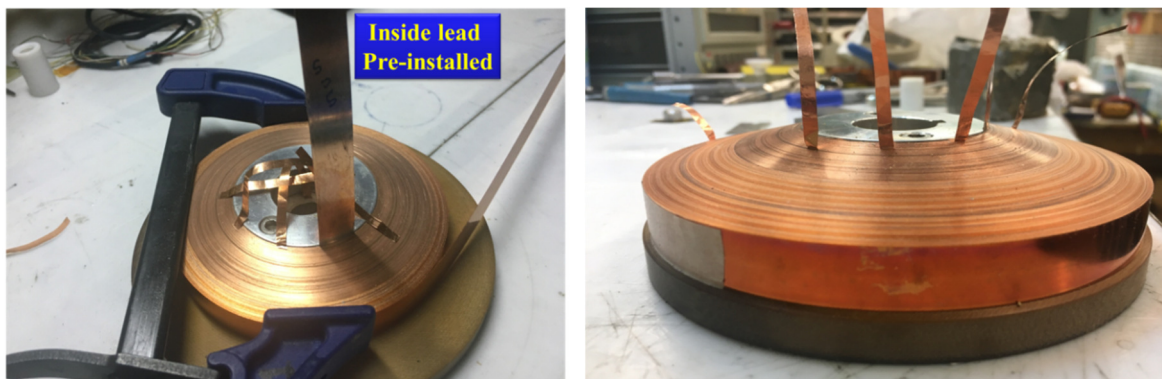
&b. HTS coil on its conical mandrel. Left: During the winding process; inside lead and voltage-taps pre-installed. Right: Winding completed.
